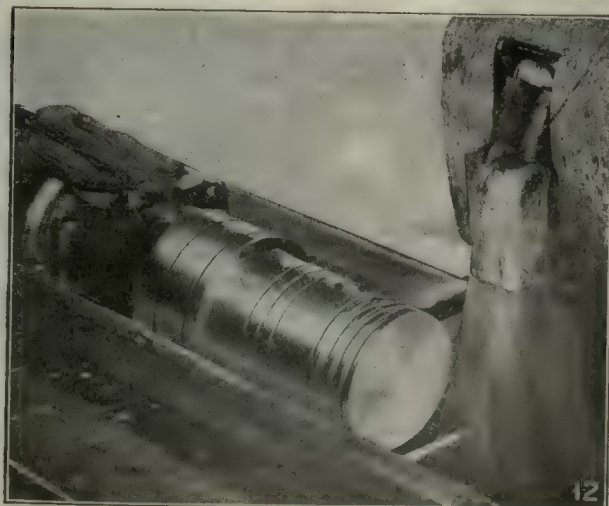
FINISHING OUTSIDE ON GRINDING MACHINE
